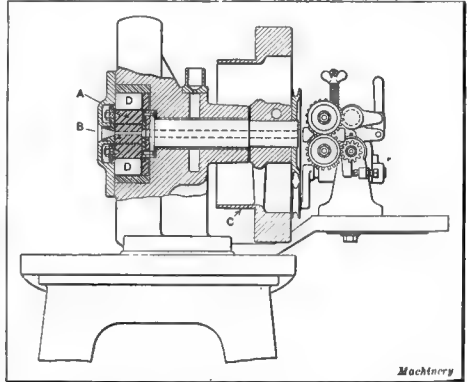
Longitudinal Section through Head of Langeller Swaging Machine
